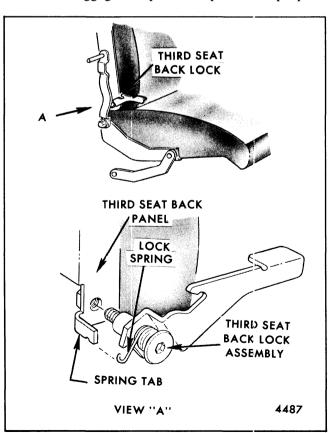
Folding Third Seat Back Lock - 'B" Body
